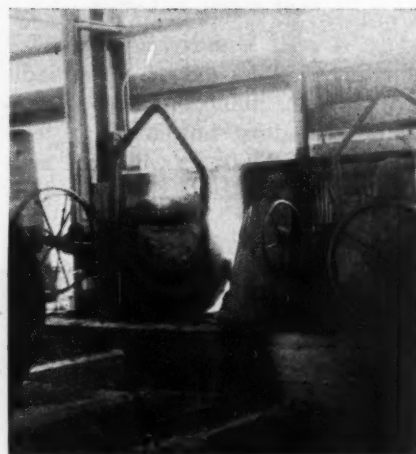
Ladles being preheated in a horizontal position against a wall heater.
